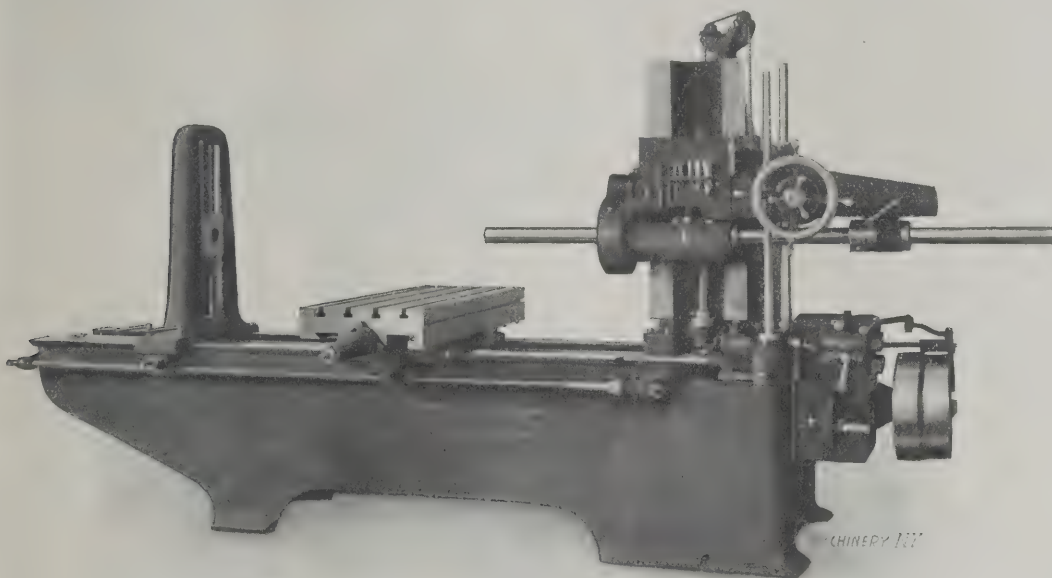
Universal Boring Machine Co.'s Horizontal Boring Machine
